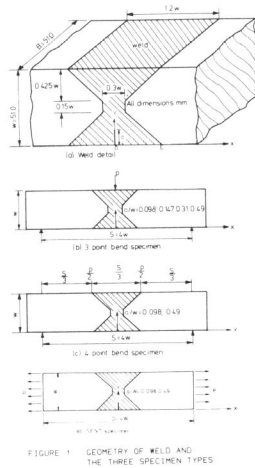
GEOMETRY OF WELD AND THE THREE SPECIMEN TYPES
